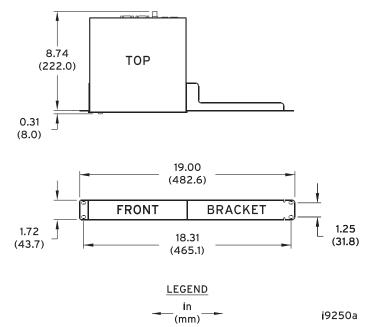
SEL-3530-4 Horizontal Rack-Mount With Bracket Dimensions
